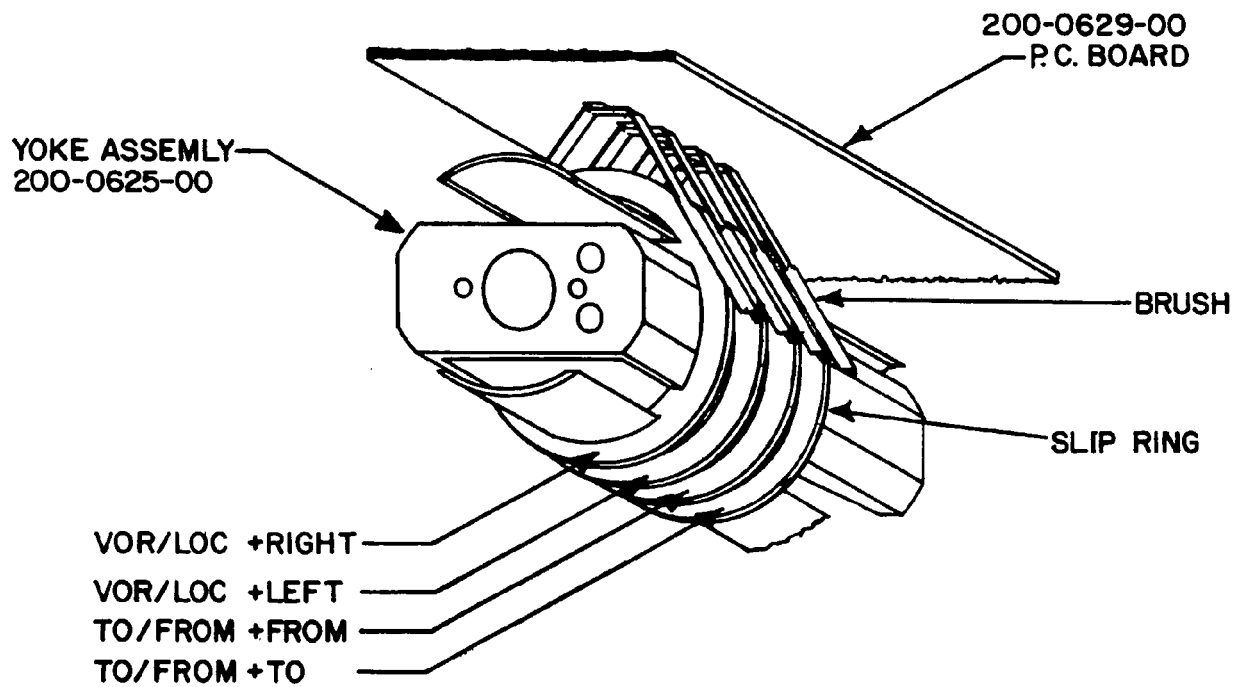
CENTER YOKE WITH NAV AND TO-FROM BRUSH ASSEMBLY
